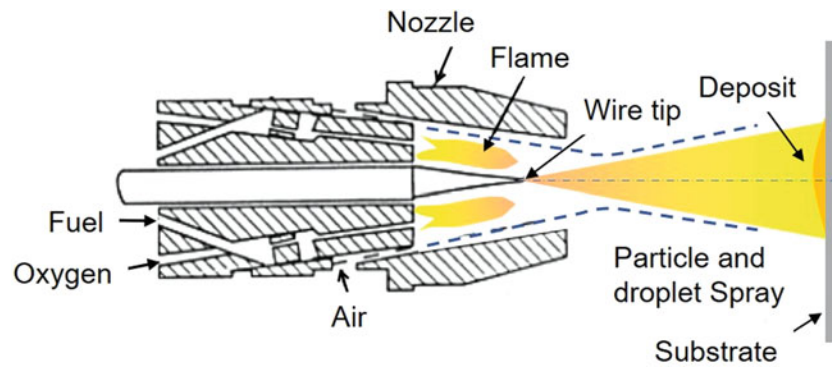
Details of the nozzle design for a Wire, Rod, or Cord Flame Spray gun [Thermal Spraying (1985)]. (Reprinted with kind permission from American Welding Society)
